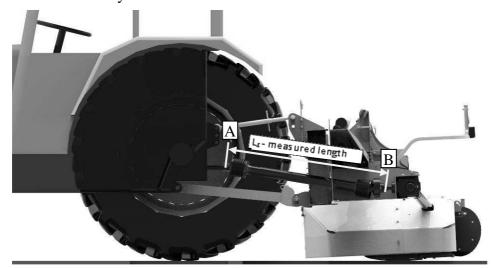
Distance between tractor's PTO shaft and machine's drive shaft
